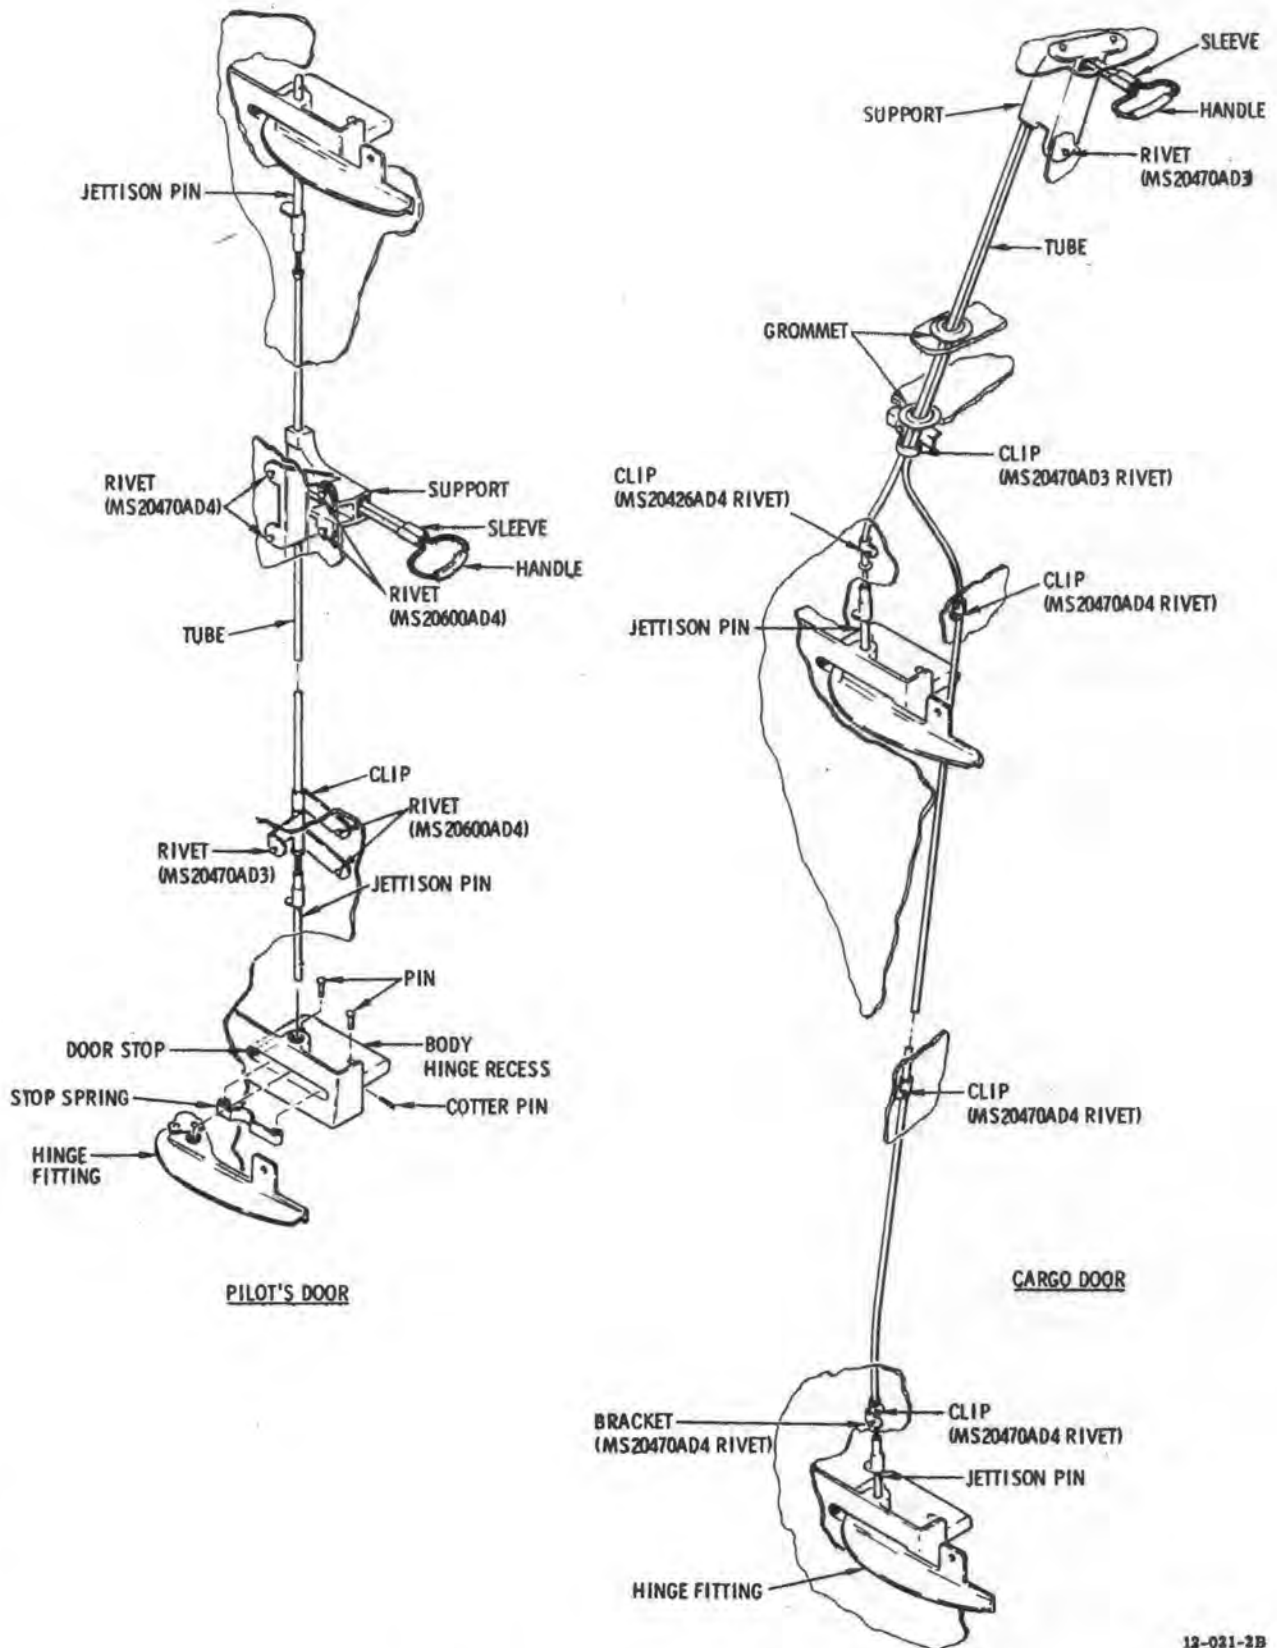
Pilot and Cargo Door Jettison Mechanism.
